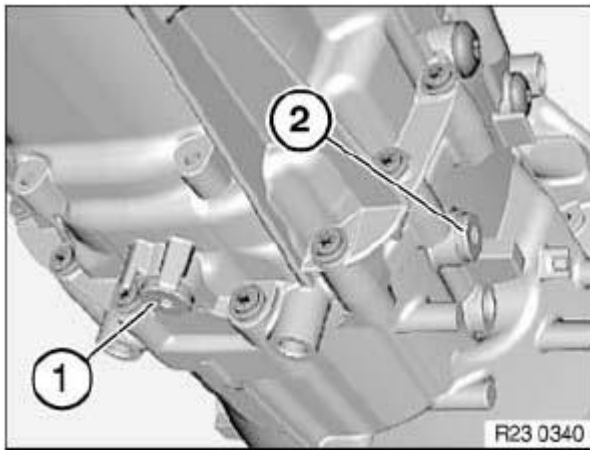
Identifying Oil Drain Plug And Filler Plug
